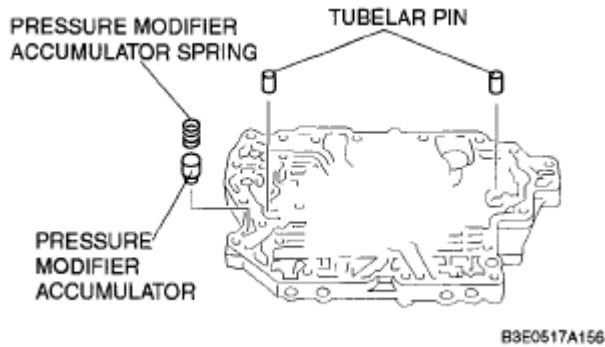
Removing Tubular Pins, Pressure Modifier Accumulator Spring And Pressure Modifier Accumulator
